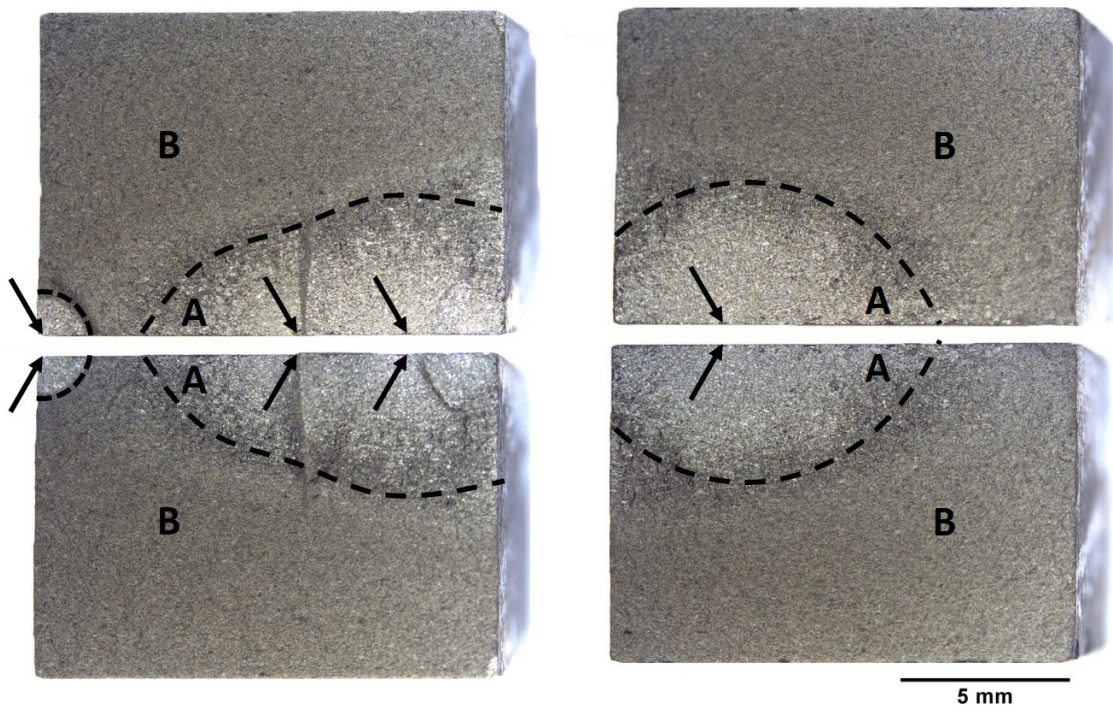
Macroscopic fatigue fracture of two Sol-Size-Age samples.
